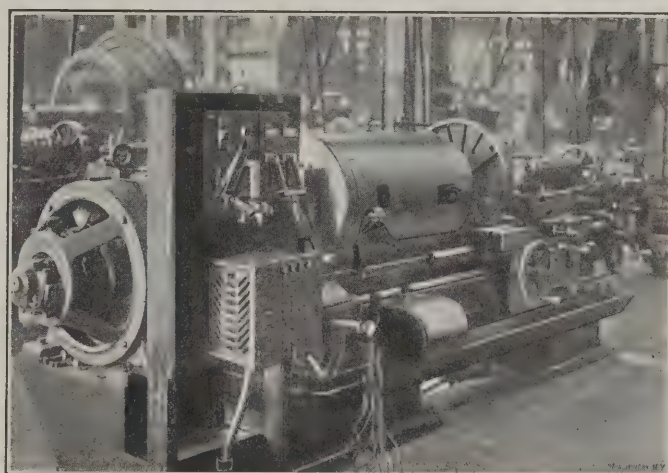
Engine-lathe used for Crankpin Work, Driven by 71-2 H. P. Motor.
